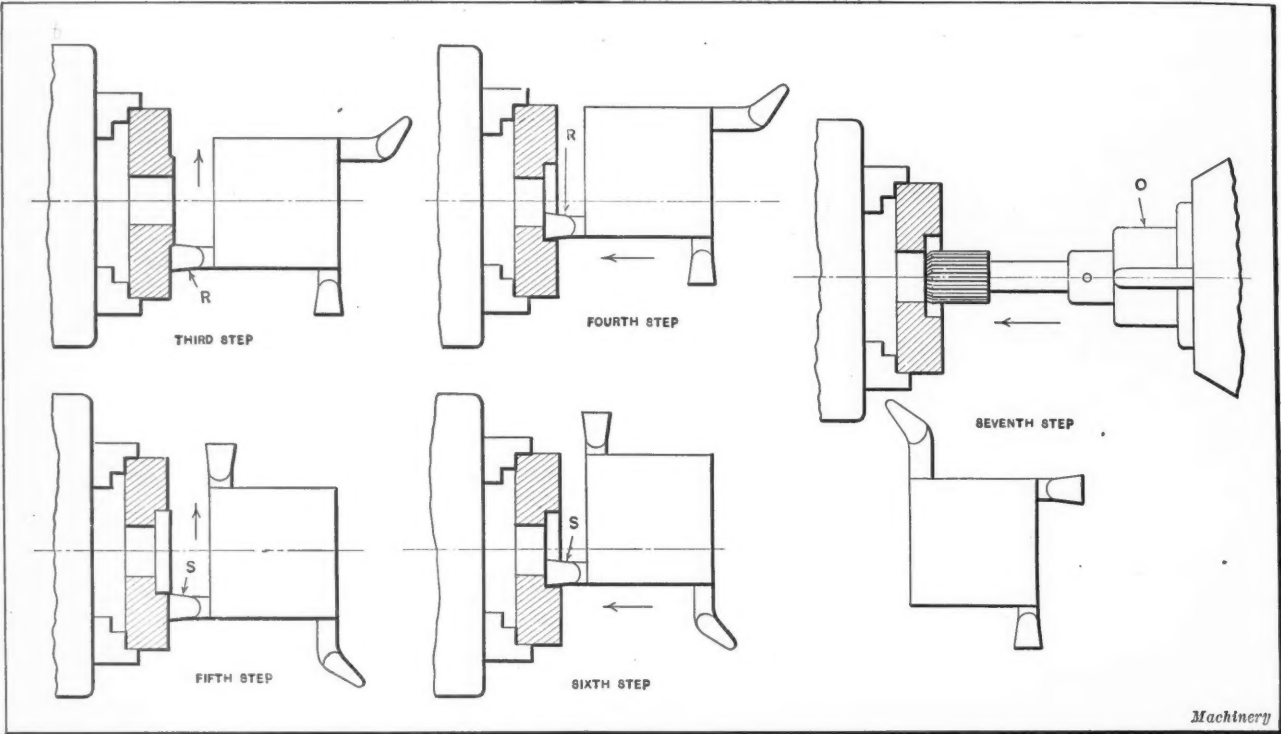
Four Facing and Recessing Steps in which Tools on the Cross-slide Turret are employed, and a Final Reaming Step accomplished by Means of a Reamer on the Hexagon Turret
